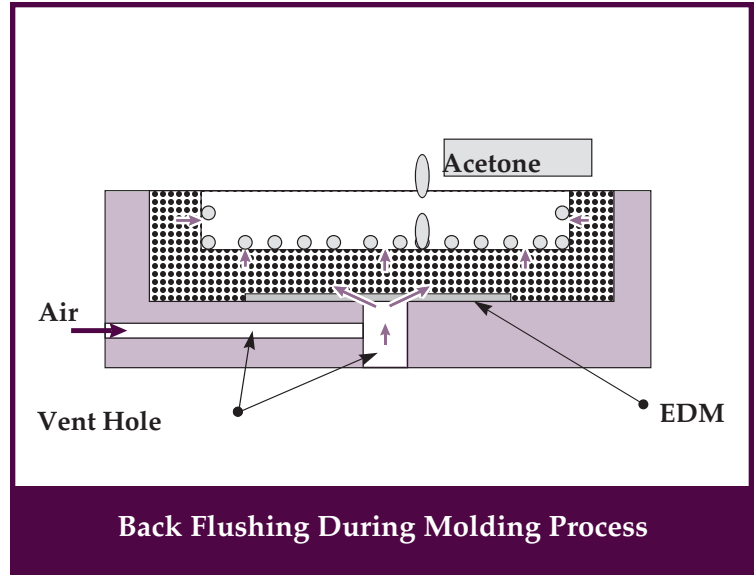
Back flushing during the molding process is an excellent method for cleaning any resin residue that might build up on the surface of Porcerax II insert. This will also extend the cycle of removing the insert and cleaning it ultrasonically.
